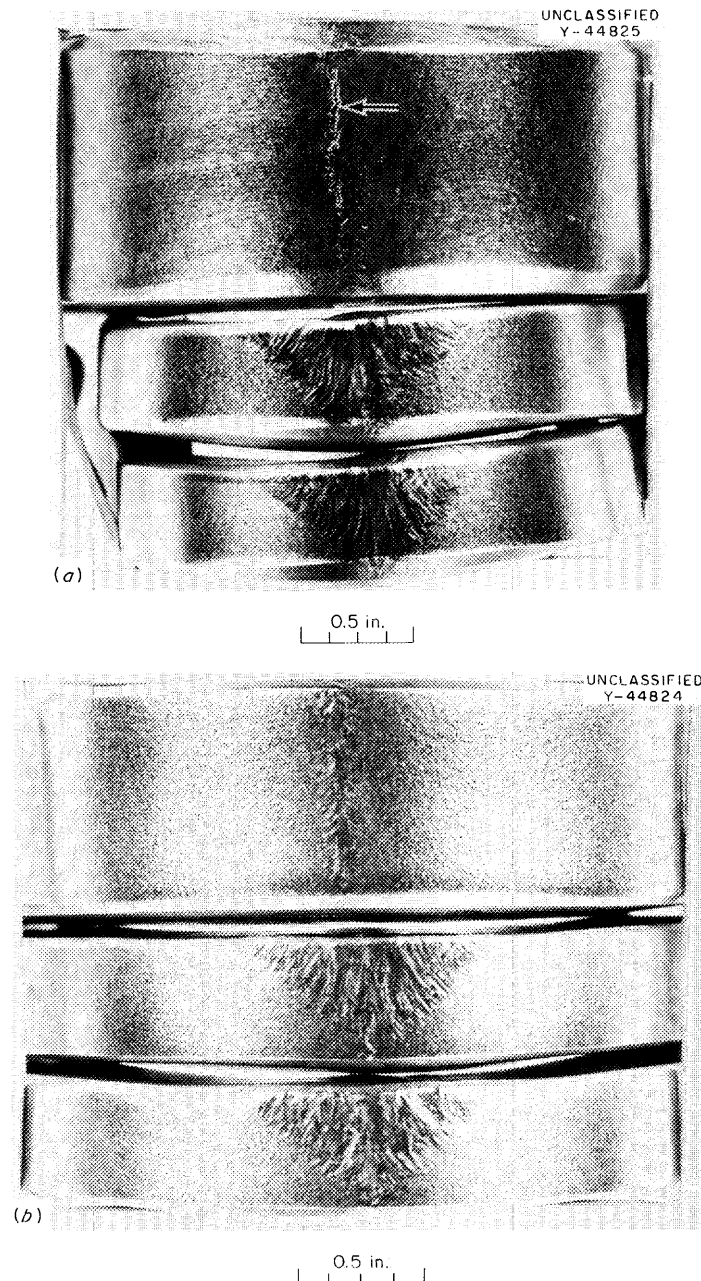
INOR-8 Qualification Weld Bend Tests. (a) INOR-8 root and side-bend tests of an unacceptable qualification weld, showing root cracking in weld area. (b) INOR-8 root and side-bend tests of an acceptable qualification weld, showing no cracks or other detrimental signs.
